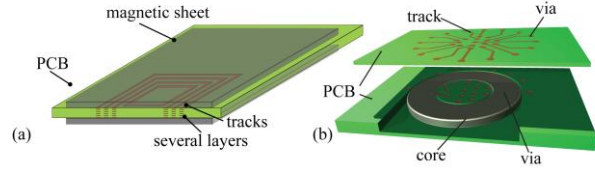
Integration methods of inductive components: (a) winding realized as tracks on several layers and (b) integrated core (e.g. foil wound to a toroid) in the PCB.
